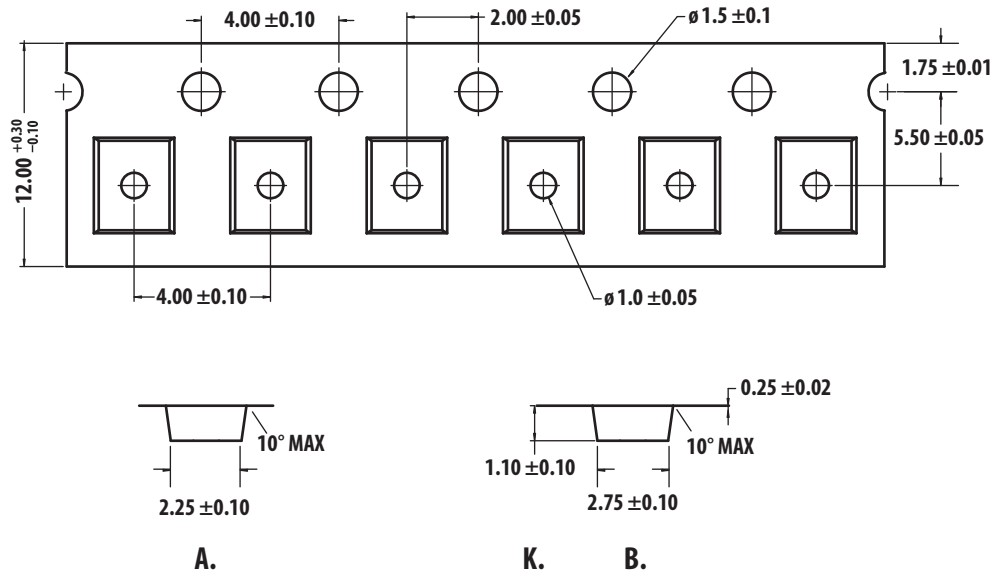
SMD Tape Packing (Dimensions for actual tape carrier may vary slightly)
